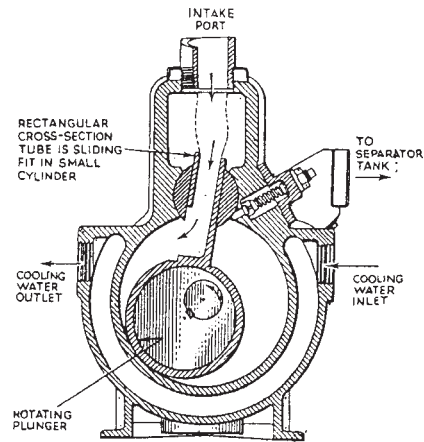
Rotary Piston design, Kinney Manufacturing Company
